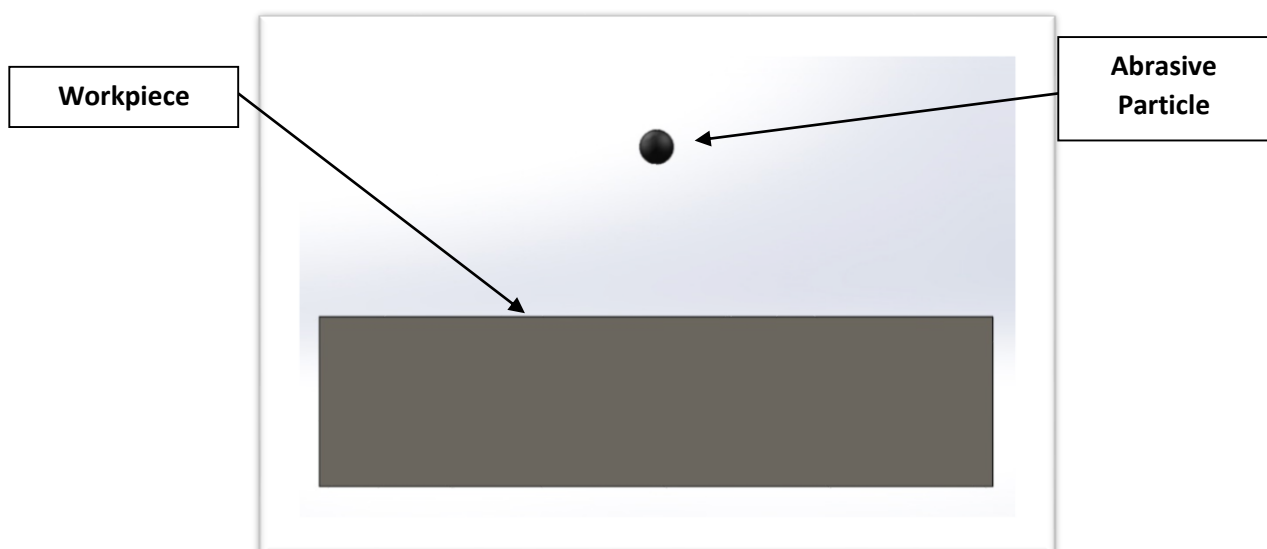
3D model for abrasive particle and workpiece (Side view)
